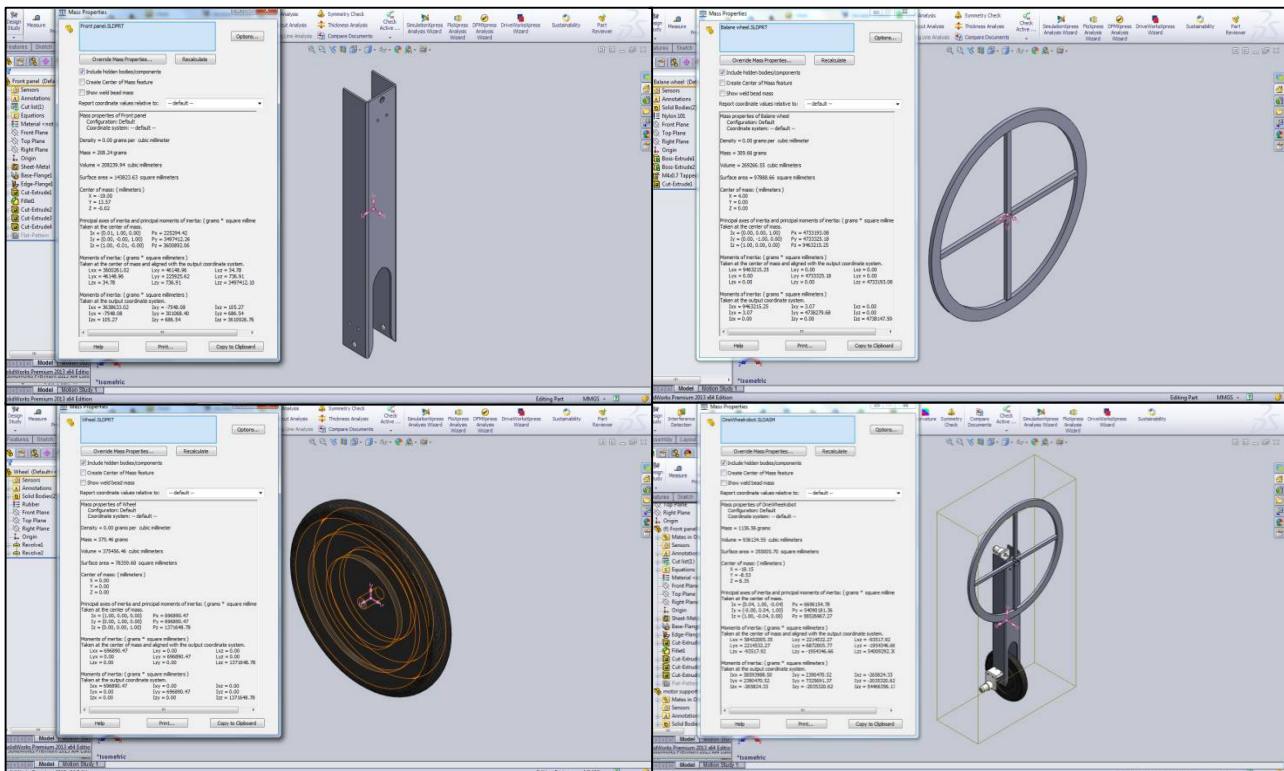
3D Model showing Drive & Reaction wheel Balancing Bot & main components.
